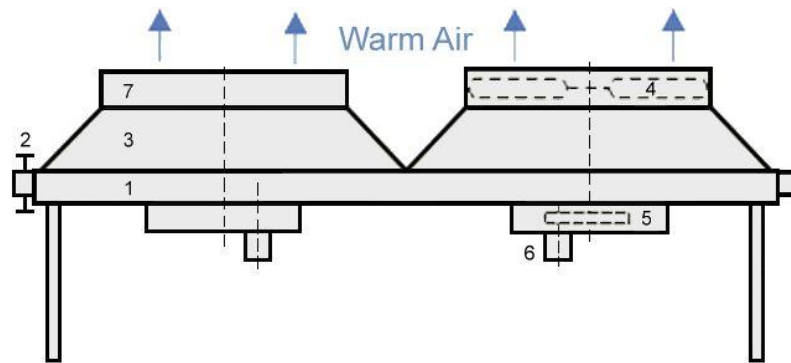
Induced Draft 1. Tube bundle, 2. Header, 3. Plenum, 4. Fan, 5. Belt Drive, 6. Motor, 7. Fan ring [15].
